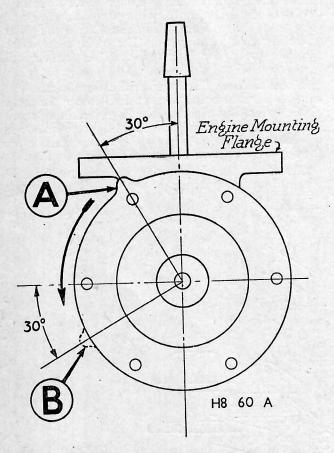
When first fitting the diaphragm to the pump body, the locating tab (A) on the diaphragm must first be in the position shown. After engaging the notches in the bottom of the pull rod, with the slot in the link, turn the diaphragm until the tab is at position (B).
